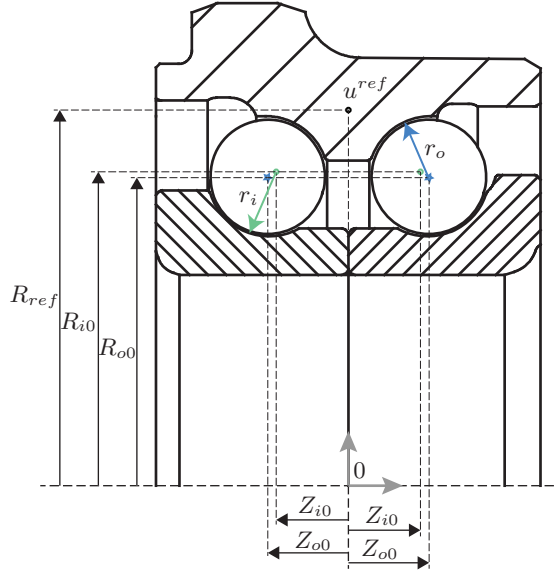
Cross-sectional view of the HBU3 bearing considered in this study
